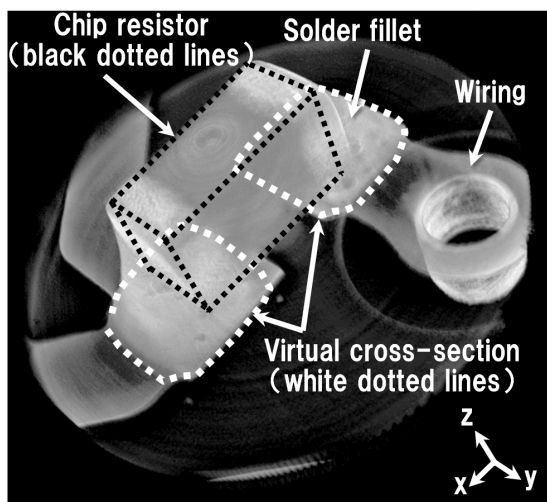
Perspective view of reconstructed 3D image of chip resistor, solder and wiring with through-hole in commercial circuit board.
